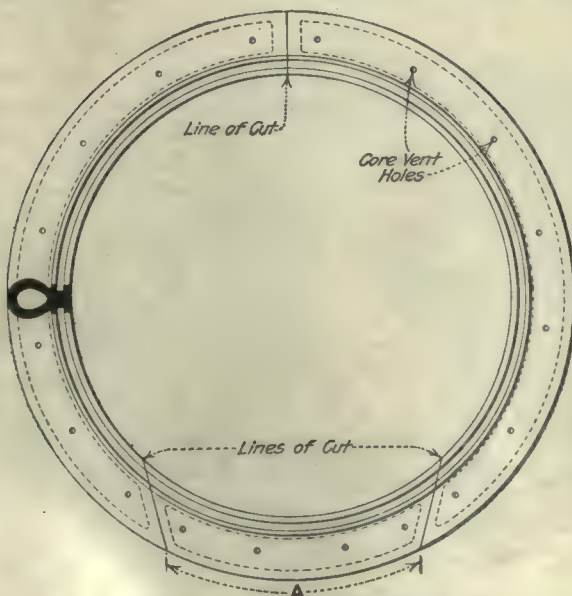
OUTLINE OF HOLLOW CORE SHOW
